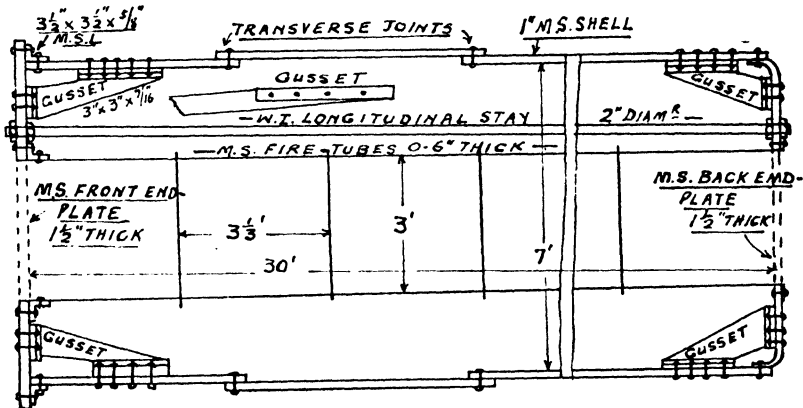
Longitudinal Section of Lancashire Boiler.
